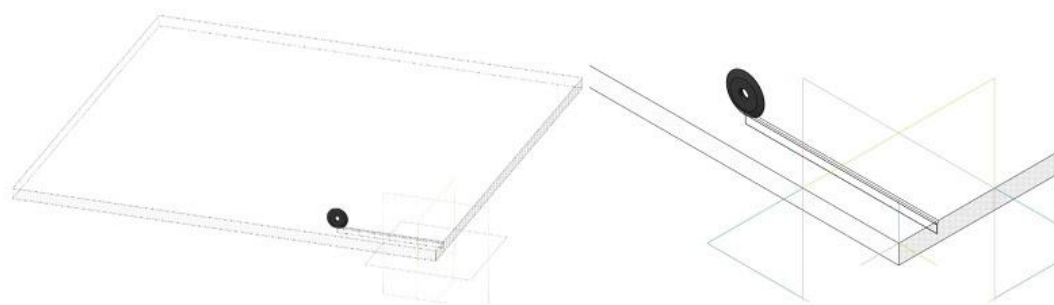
3D model of mechanical glass cutting with a cutting roller
